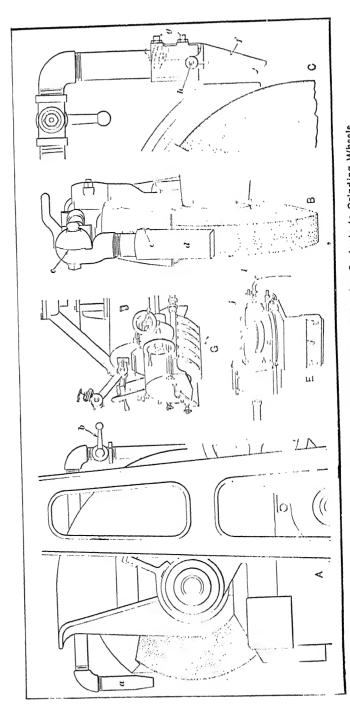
Miscellaneous Examples of Distributors for delivering Coolants to Grinding Wheels
